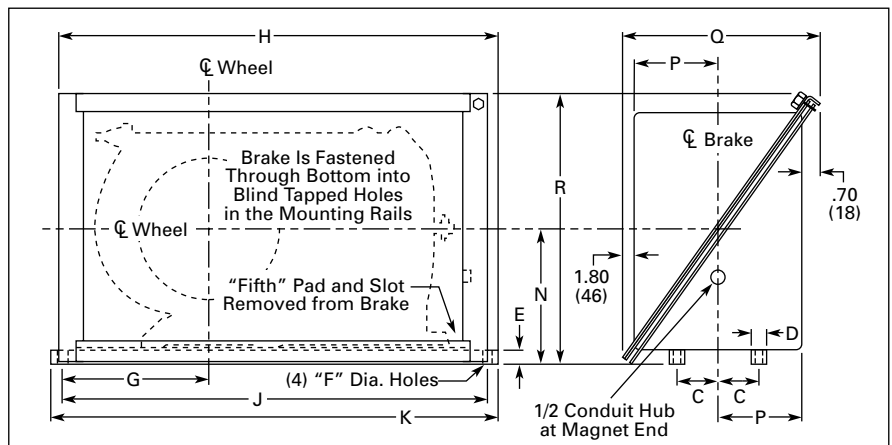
NEMA 4 Enclosure Dimensions in Inches (mm)
